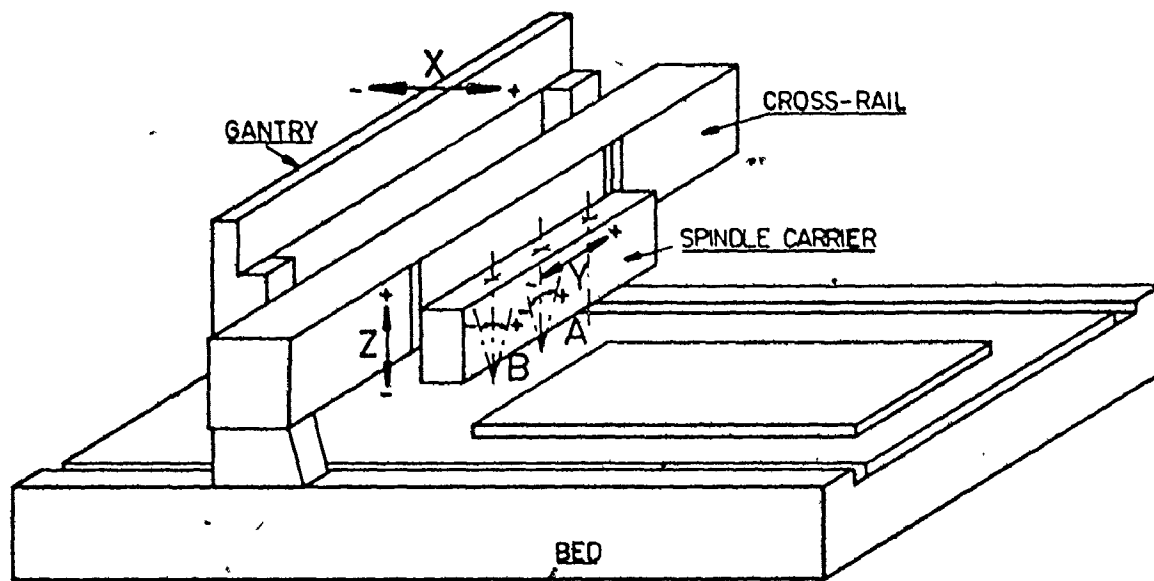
The Axis Nomenclature of a 5-Axis Aerospace Skin-Milling Machine.
